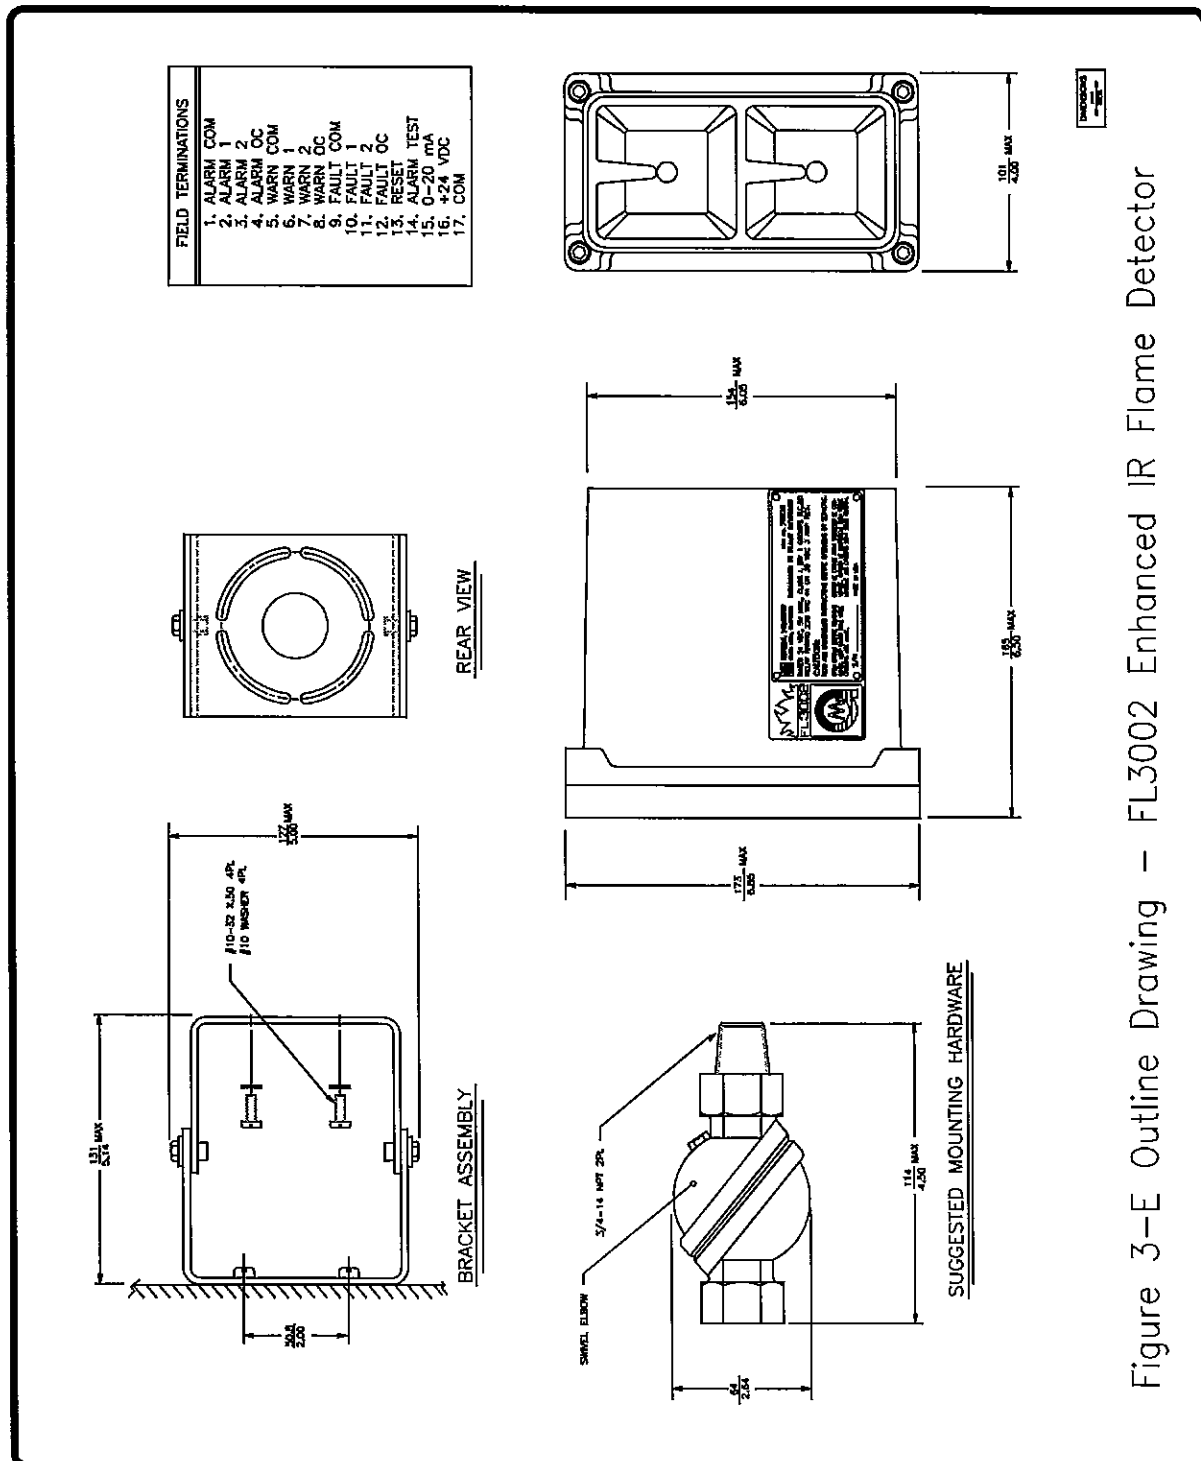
E Outline Drawing - FL3002 Enhanced IR Flame Detector
